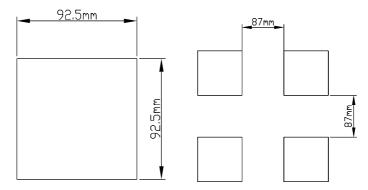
Panel mounting hole size and minimum distance between instrument cabinet square holes
